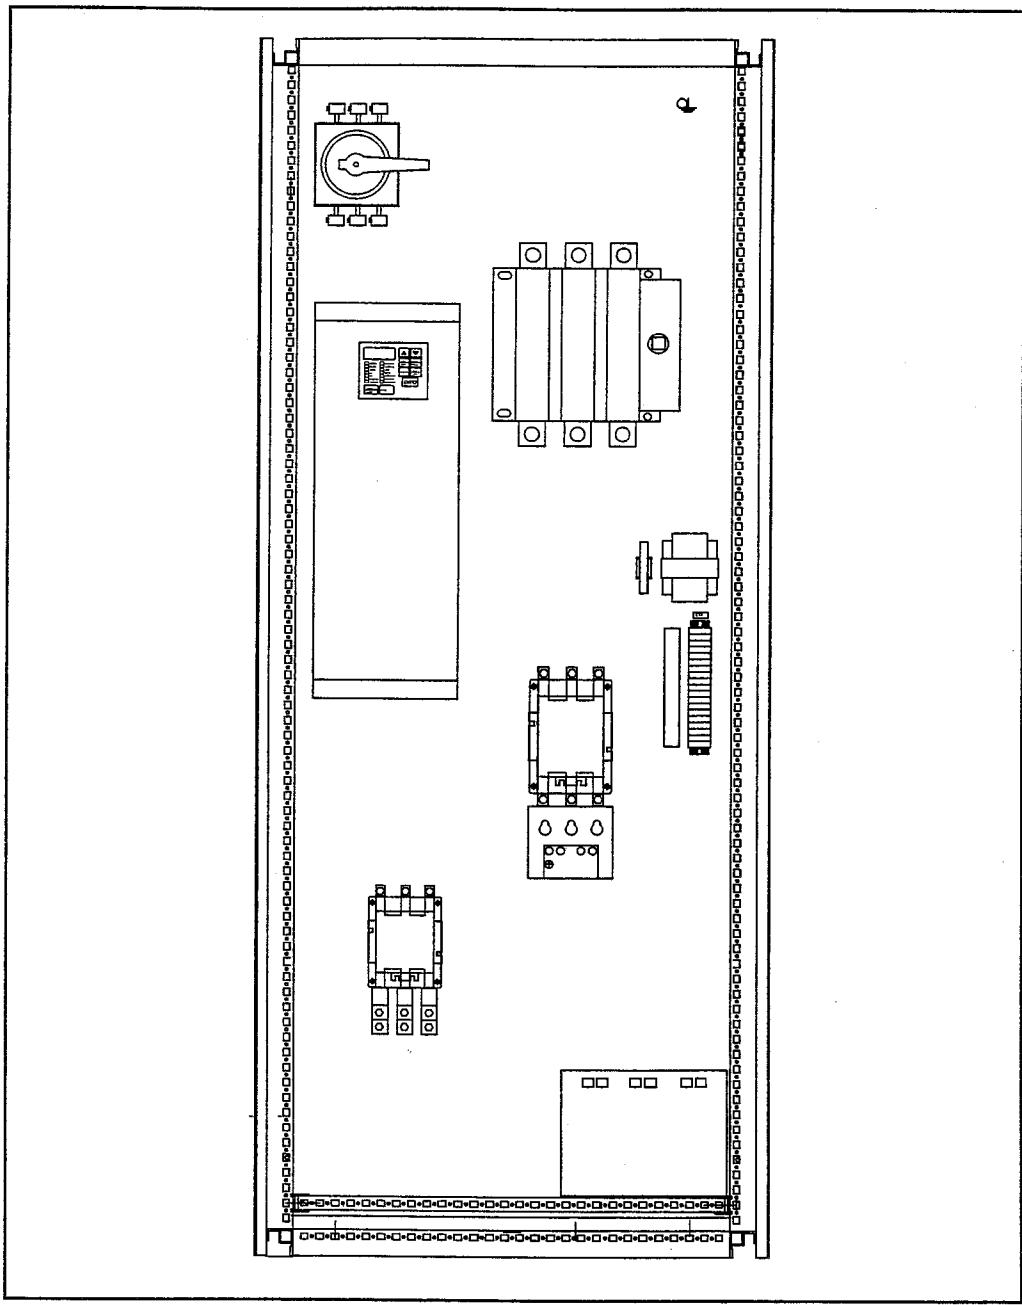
Floor Mount Option Style B+ Drive Panel Layout (100HP @ 208V/75-200HP @ 460V)
